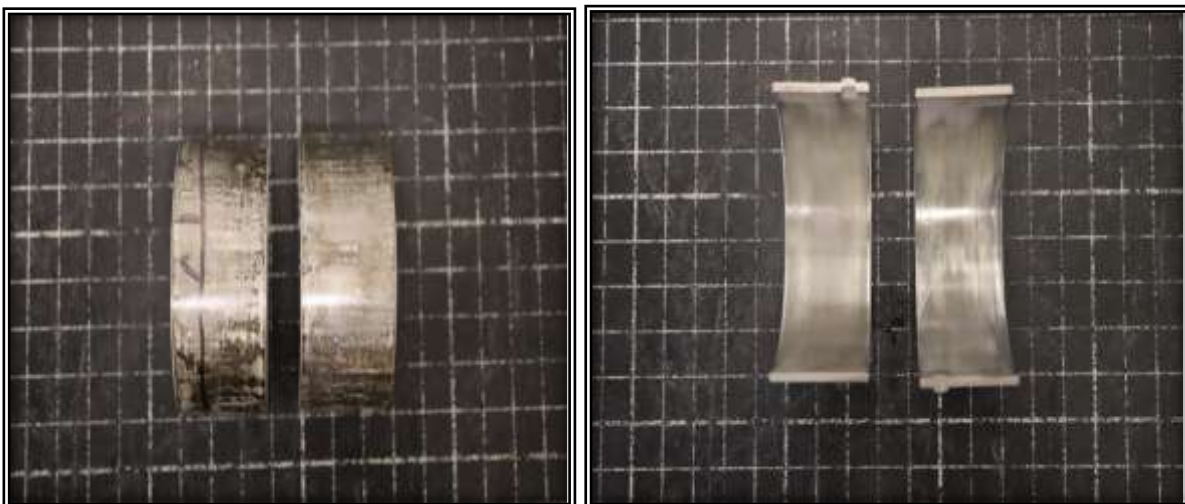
The connecting rod bearings after being removed from the number 4 connecting rod assembly. A jagged scratch was observed on one of the bearings, with standard wear.
